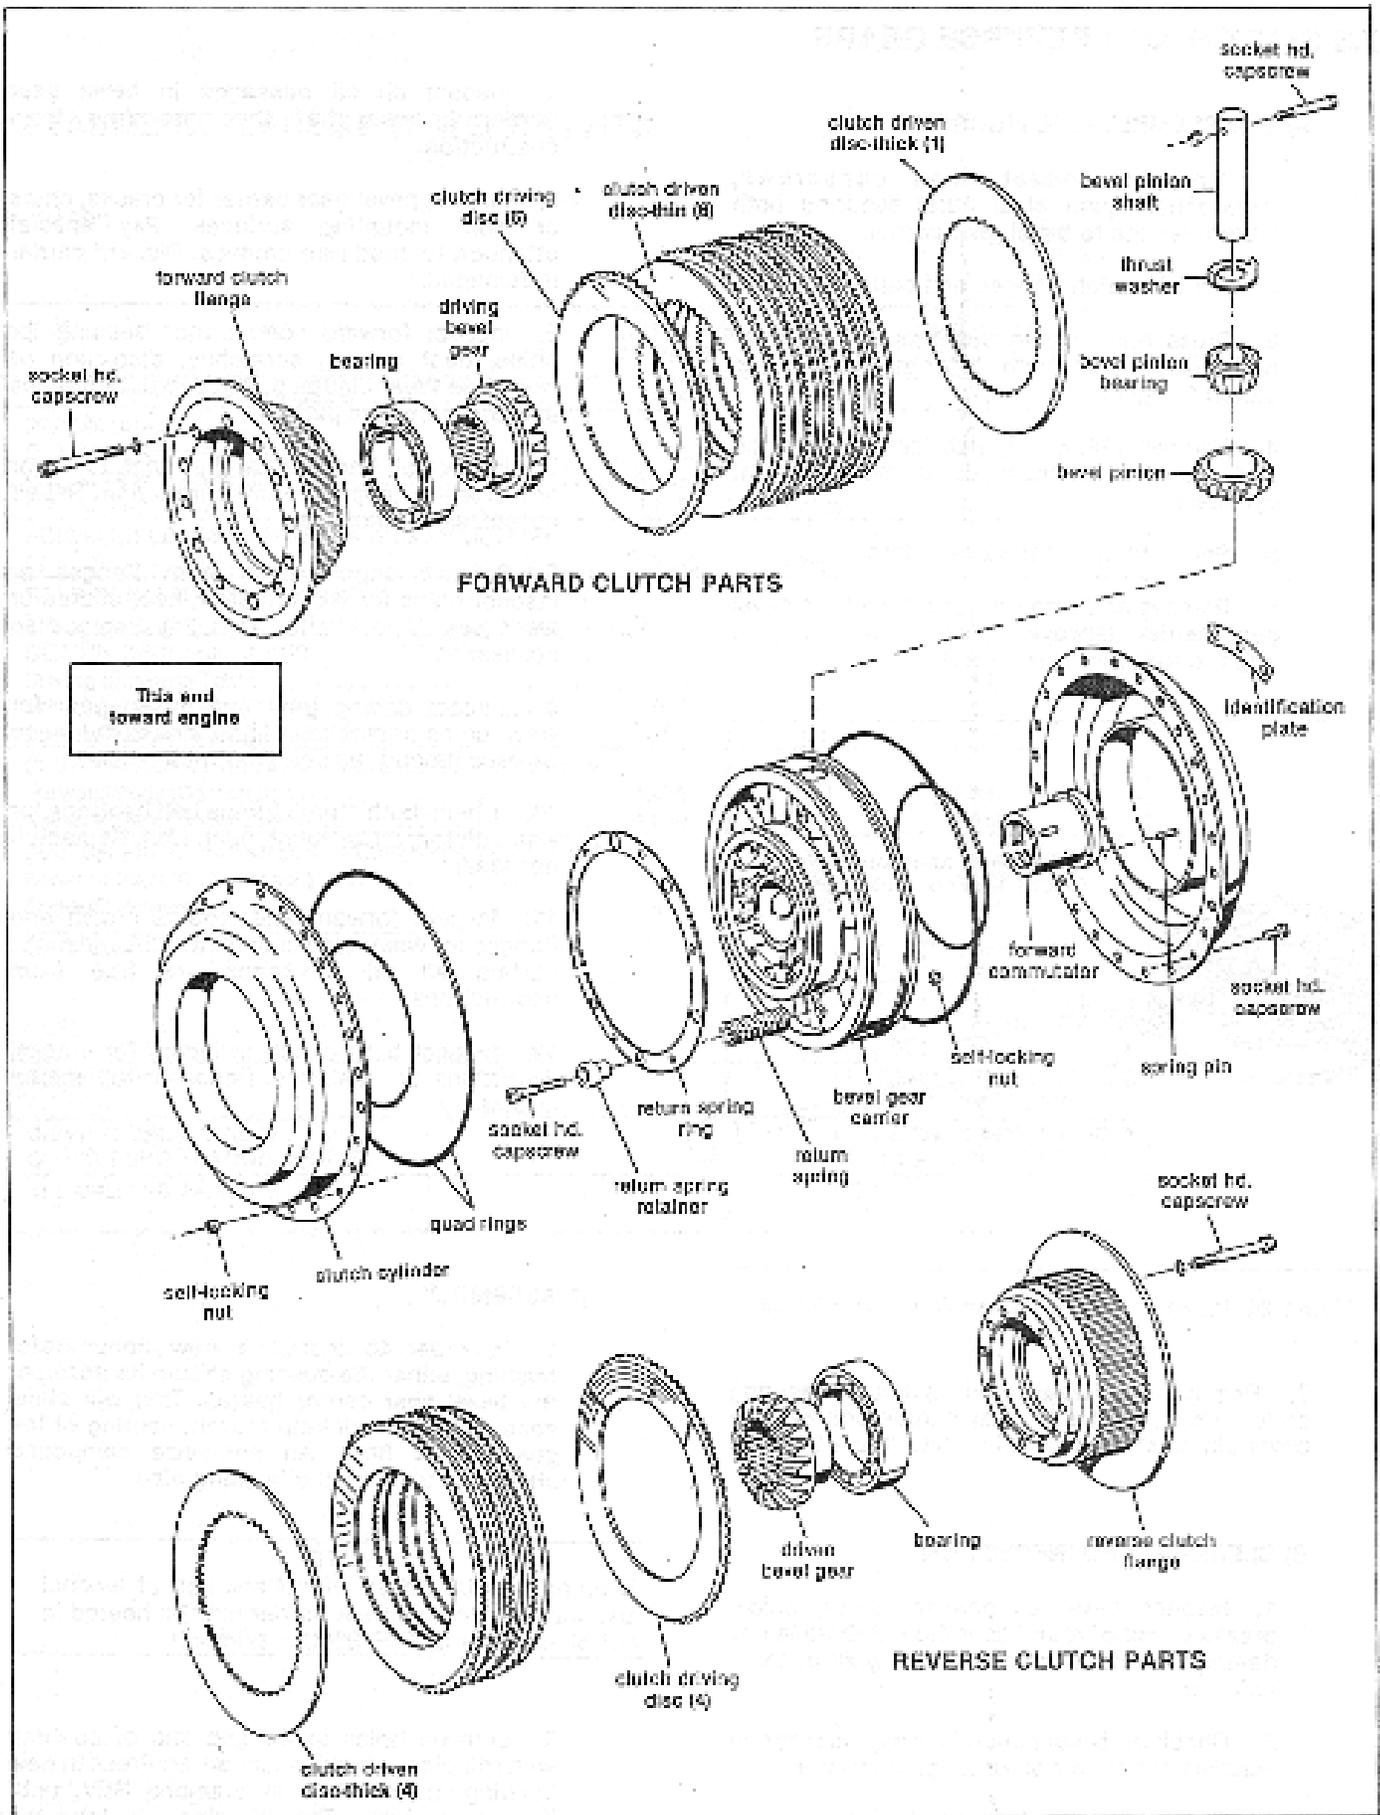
Exploded View of Standard Clutch no. 1-00100-5004.
